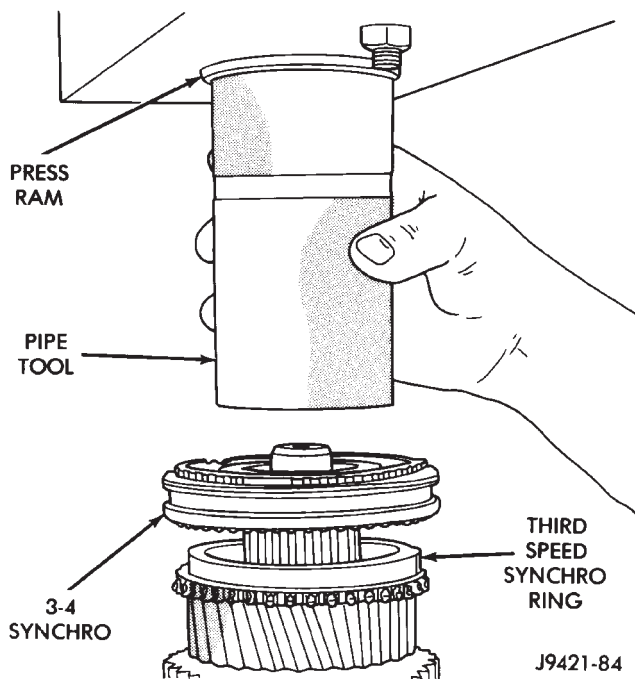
Pressing 3-4 Synchro Assembly On Output Shaft
